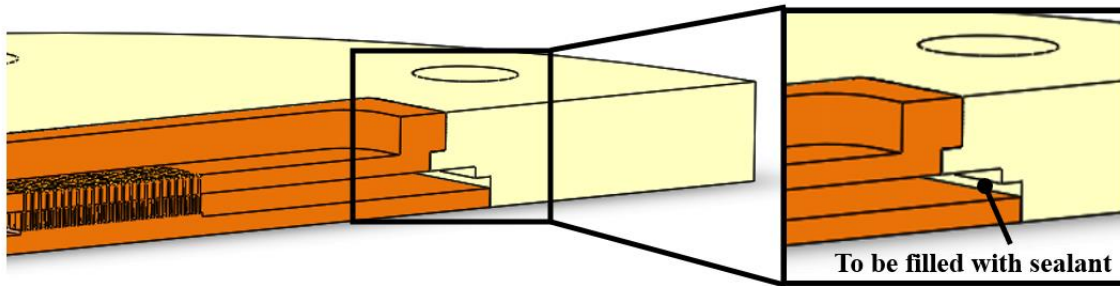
Assembly between the manifold, the manifold support, and the base, showing the gap that needs to be filled with sealant to prevent any leaks during the assembly.
